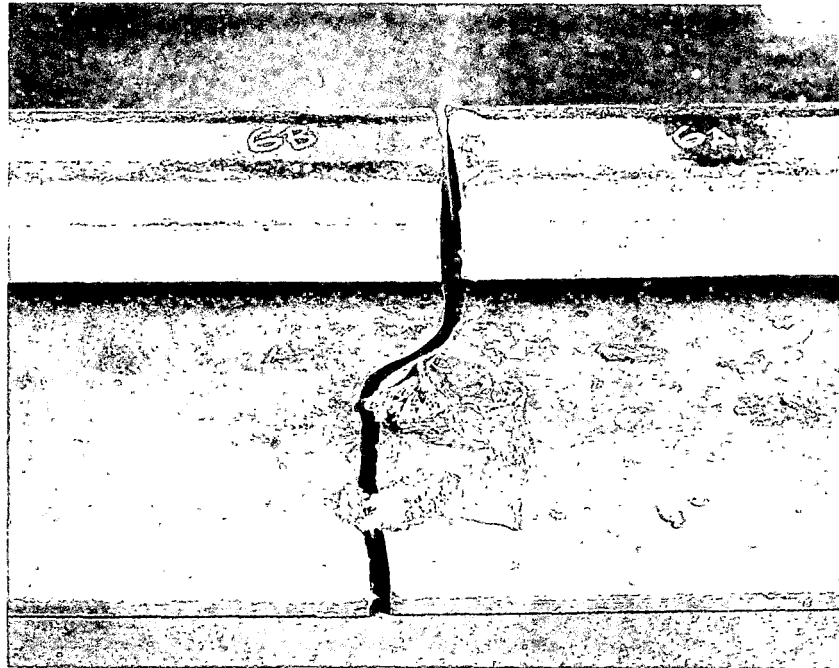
Failure specimen #6 showing typical bus bond type failure.
